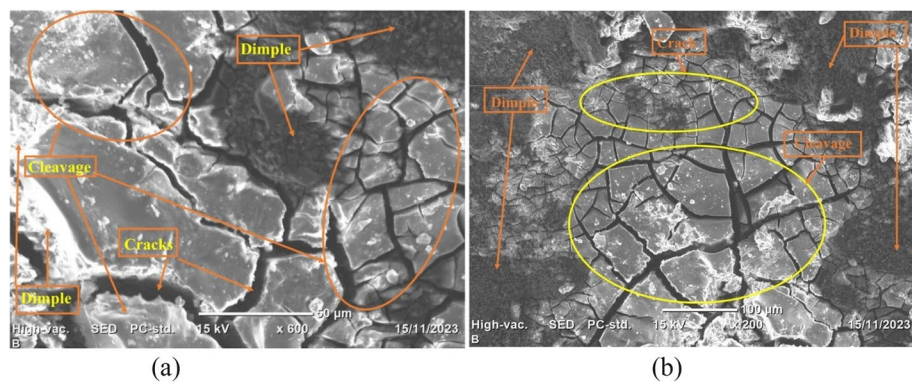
Fractography analysis of compressed optimal sample. a Analysis of the fracture morphology analysis. b Surface fracture at low magnification
